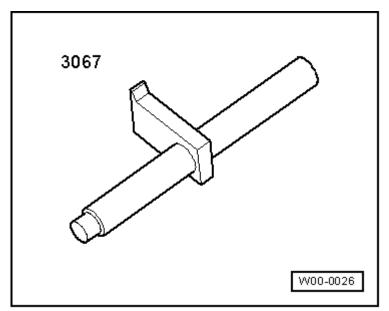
3067 Counter-Hold Tool Courtesy of AUDI OF AMERICA, LLC
